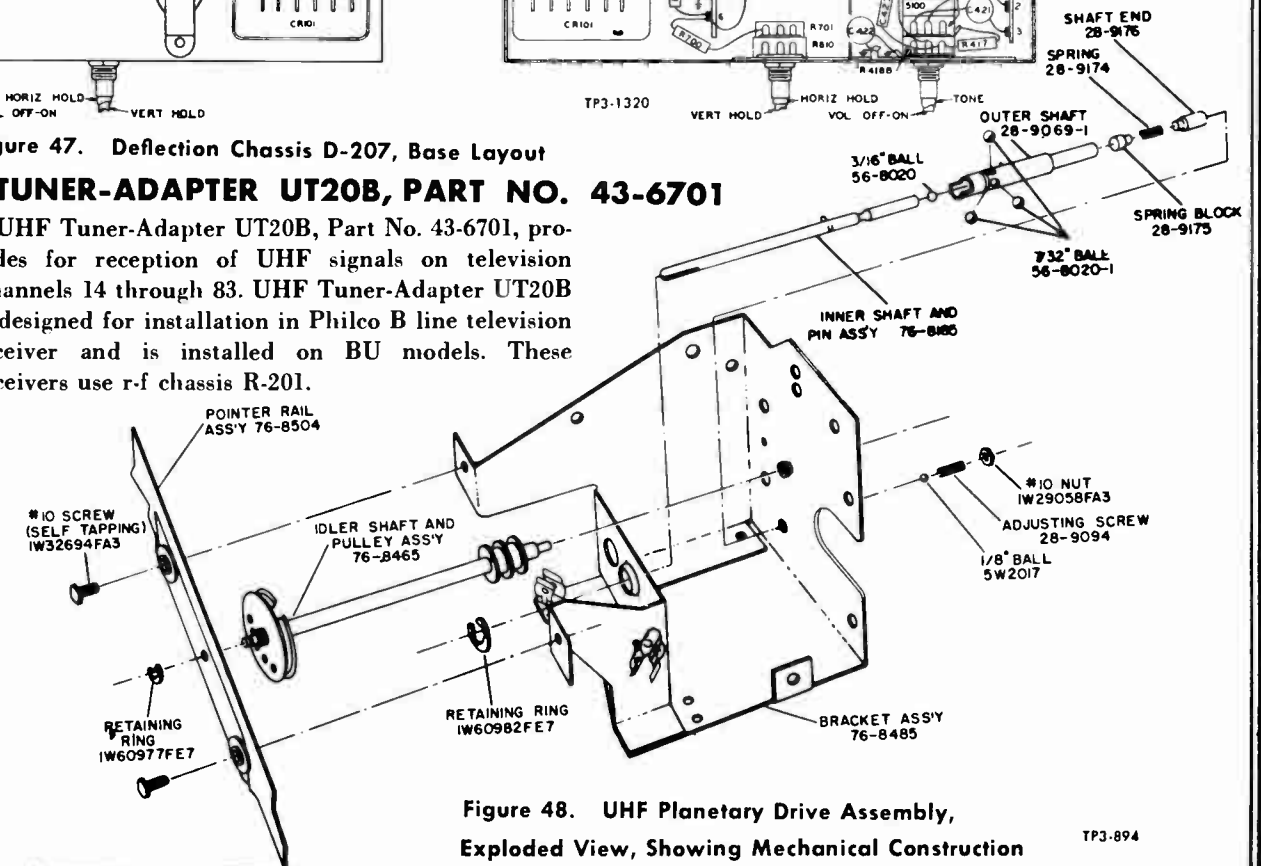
UHF Planetary Drive Assembly, Exploded View, Showing Mechanical Construction
